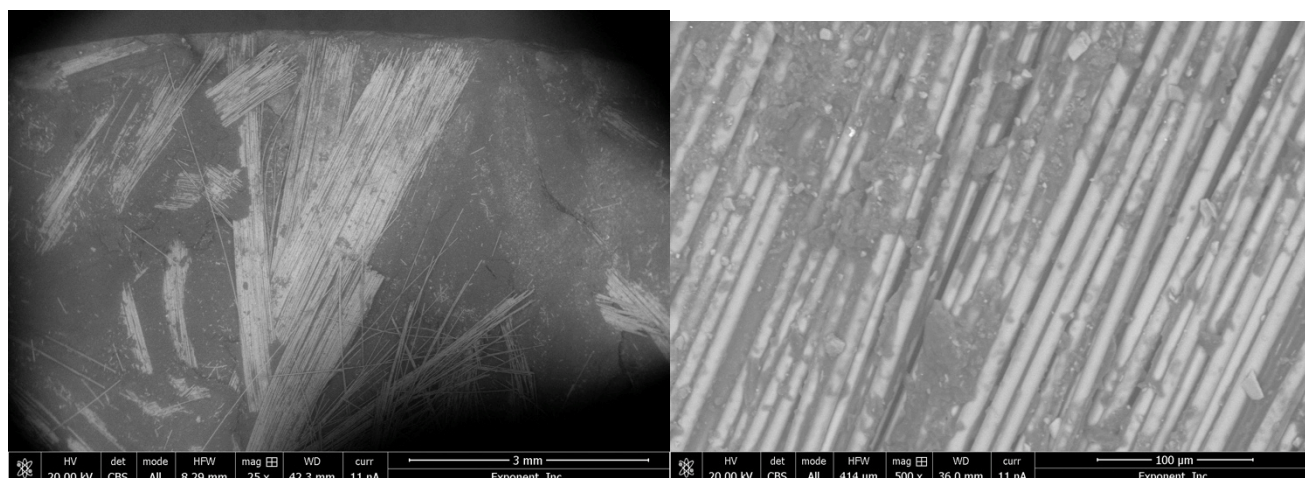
Fracture at location “A” shows cracking developed along fibers due to shear loading.
